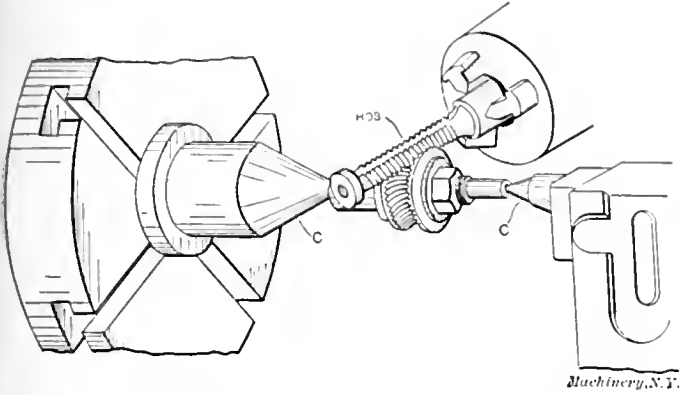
Cutting a Concave Knurl by a Hob in the Milling Machine
